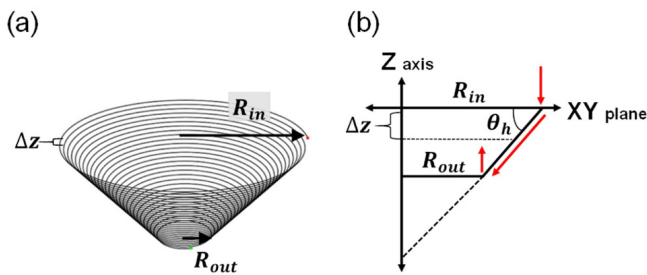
(a) Tool path and (b) Parameters of cup shape in incremental forming
